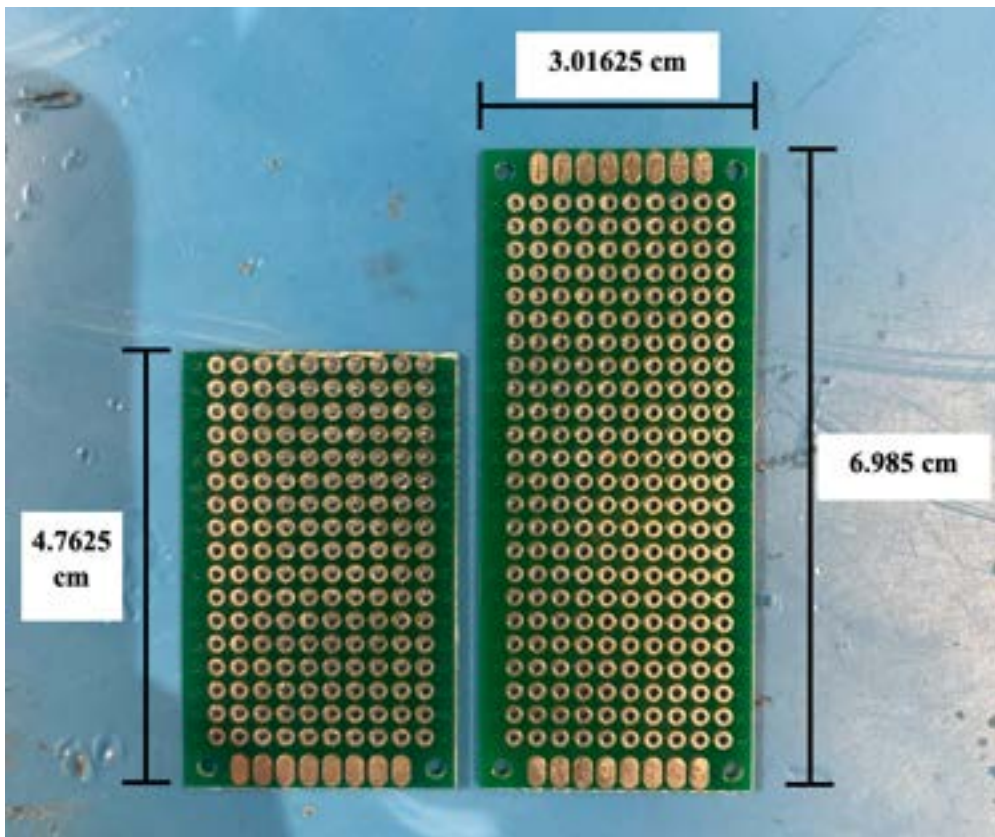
Figure X. Solder Board. The solder board was sourced from the BME 400 storage closet. To fit within the electronics box, its length was cut down to 4.7625 cm from 6.985 cm.
